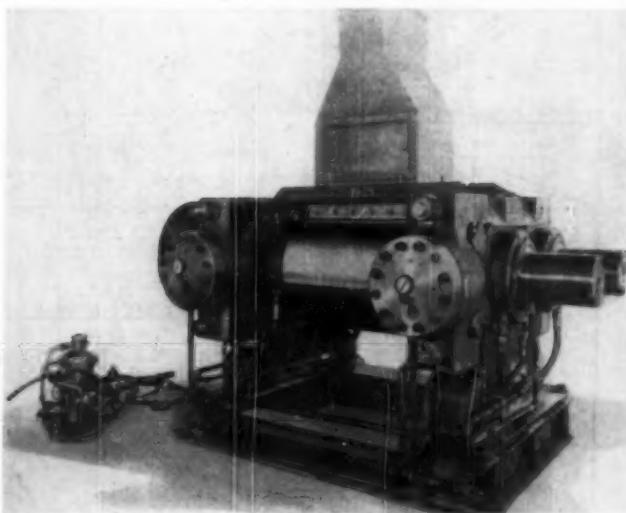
Compacting machine. (Courtesy Allis-Chalmers Mfg. Co.)
